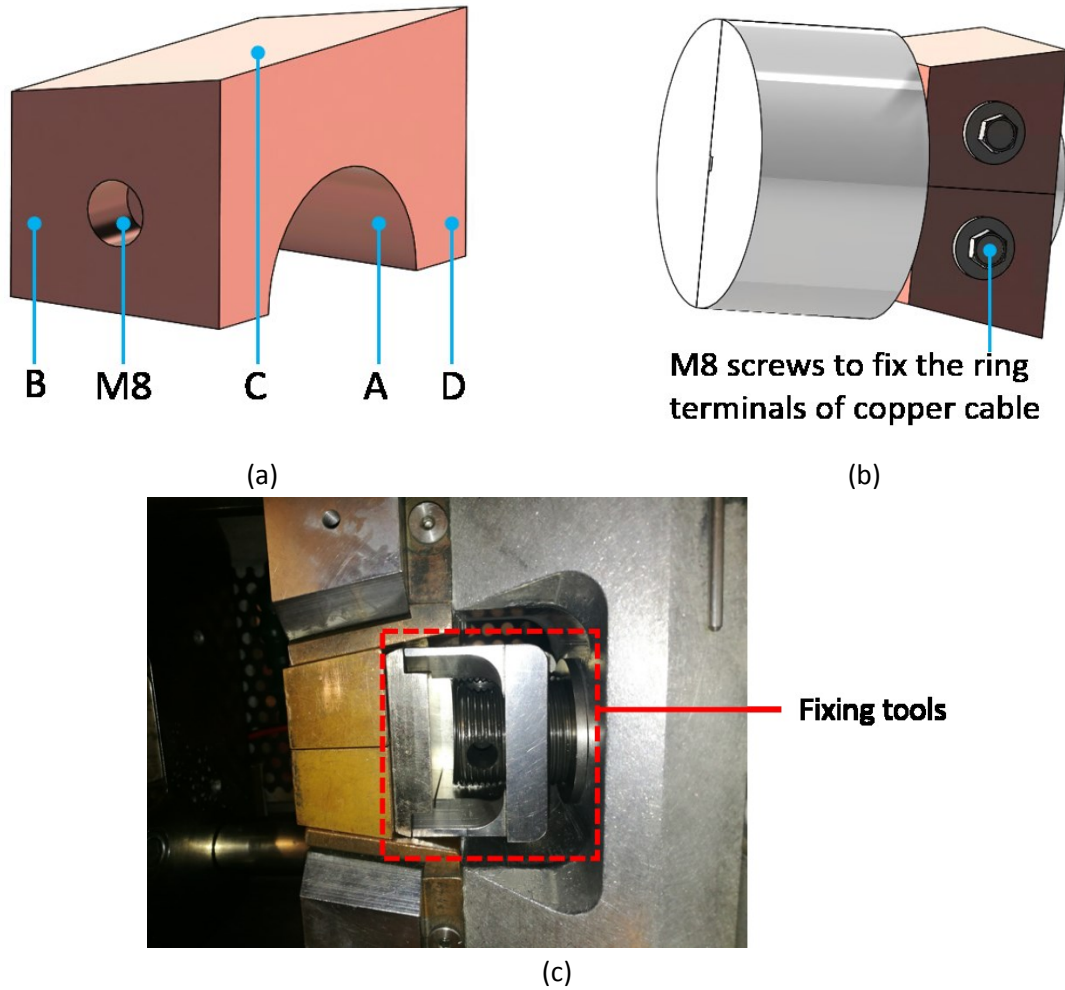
Grips (original version): (a) half grip; (b) grips holding die and connecting to cables; (c) fixing tools.
